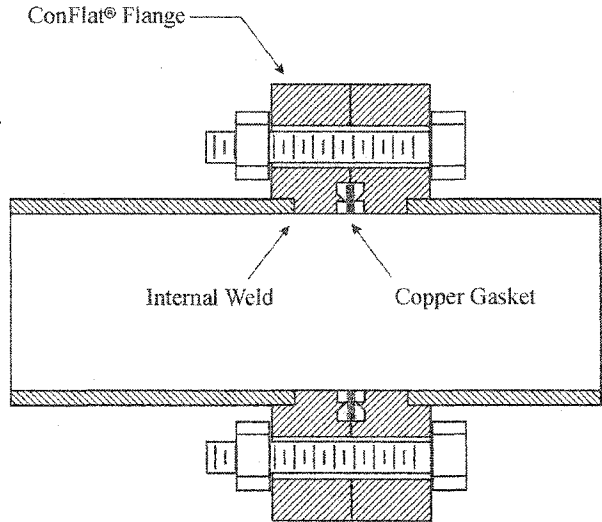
Cutaway diagram illustrating a typical Conflat®, all-metal UHV flange seal
